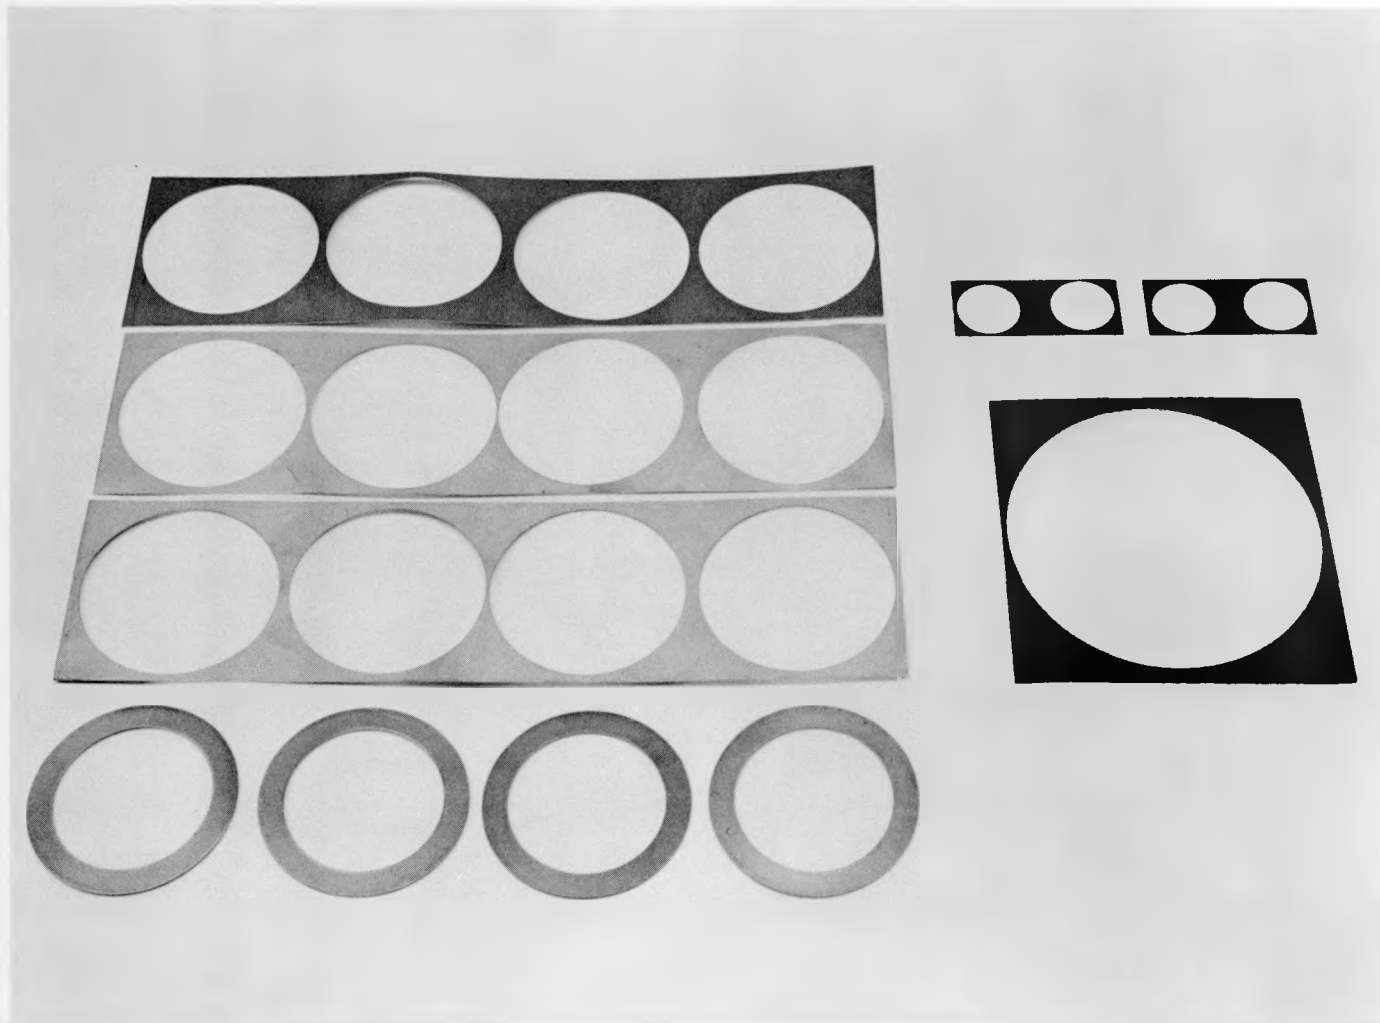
Washers (3 in. O.D.) stamped cold from 20 mil hot-rolled Mo sheet.
